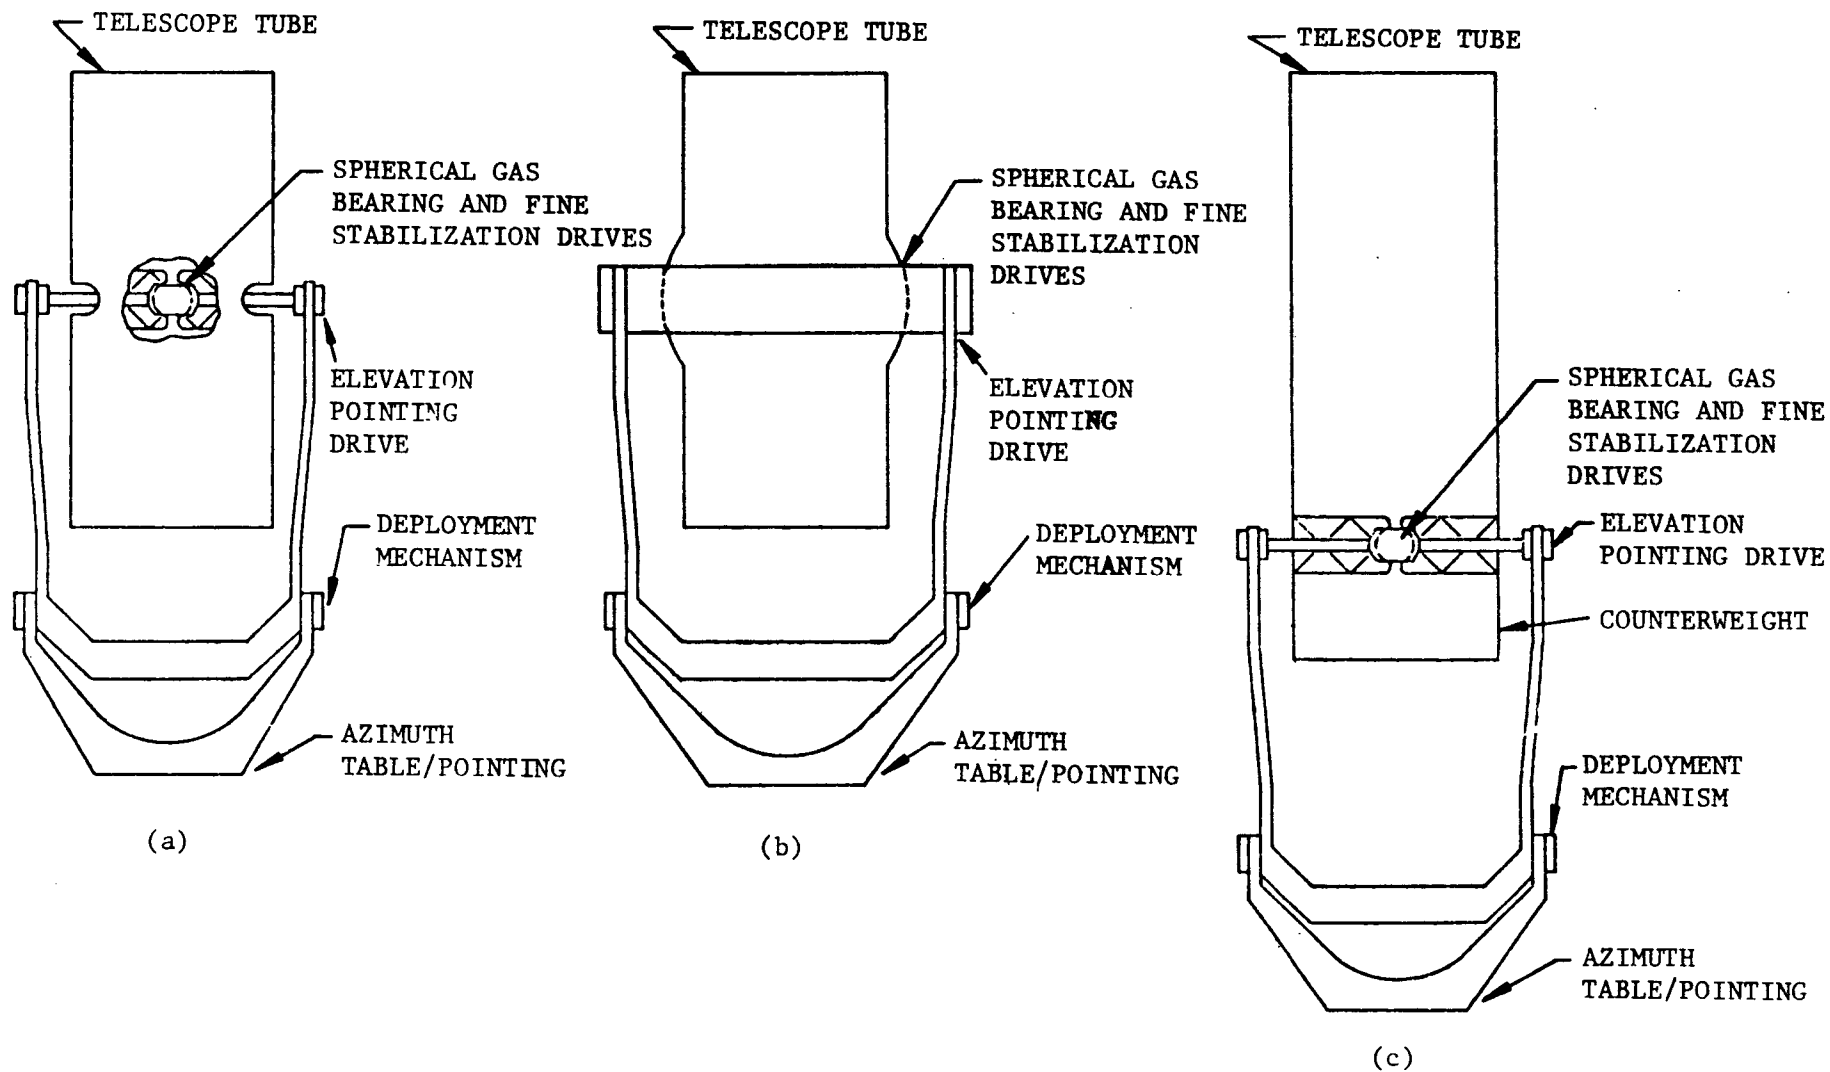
Small Angle Spherical Gas Bearing Configurations
